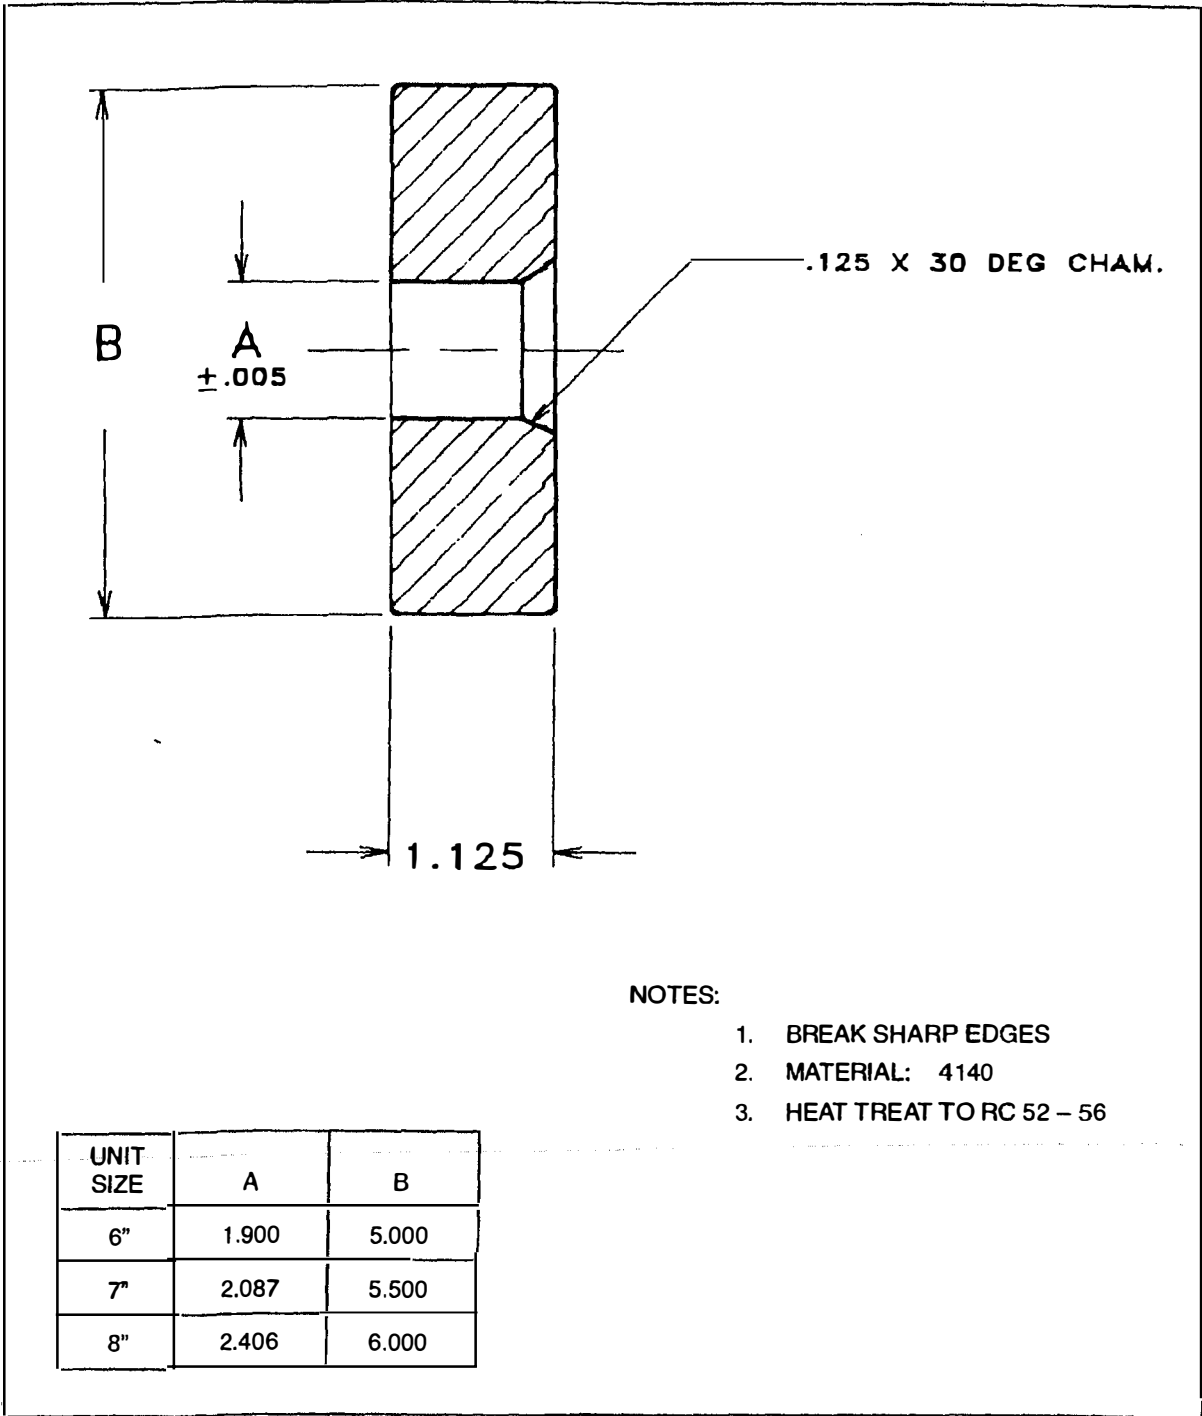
BEARING PRESS TOOL - MECHANICAL SEAL UNITS - SK2156
